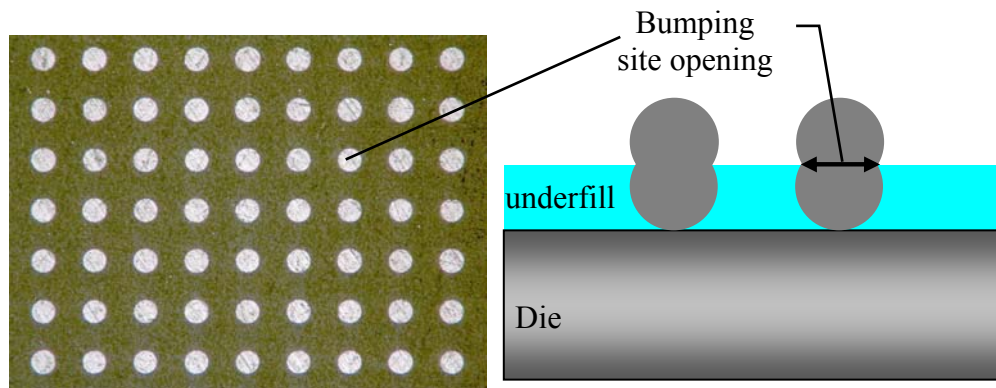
Bumping site (a) top view of the polished wafer surface with exposed solder ball top as bumping site (b) schematic side view showing bumping site opening
